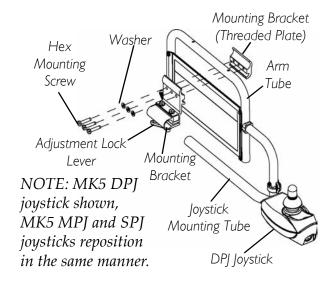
REMOVING/INSTALLING/REPOSITIONING MK5 JOYSTICK
